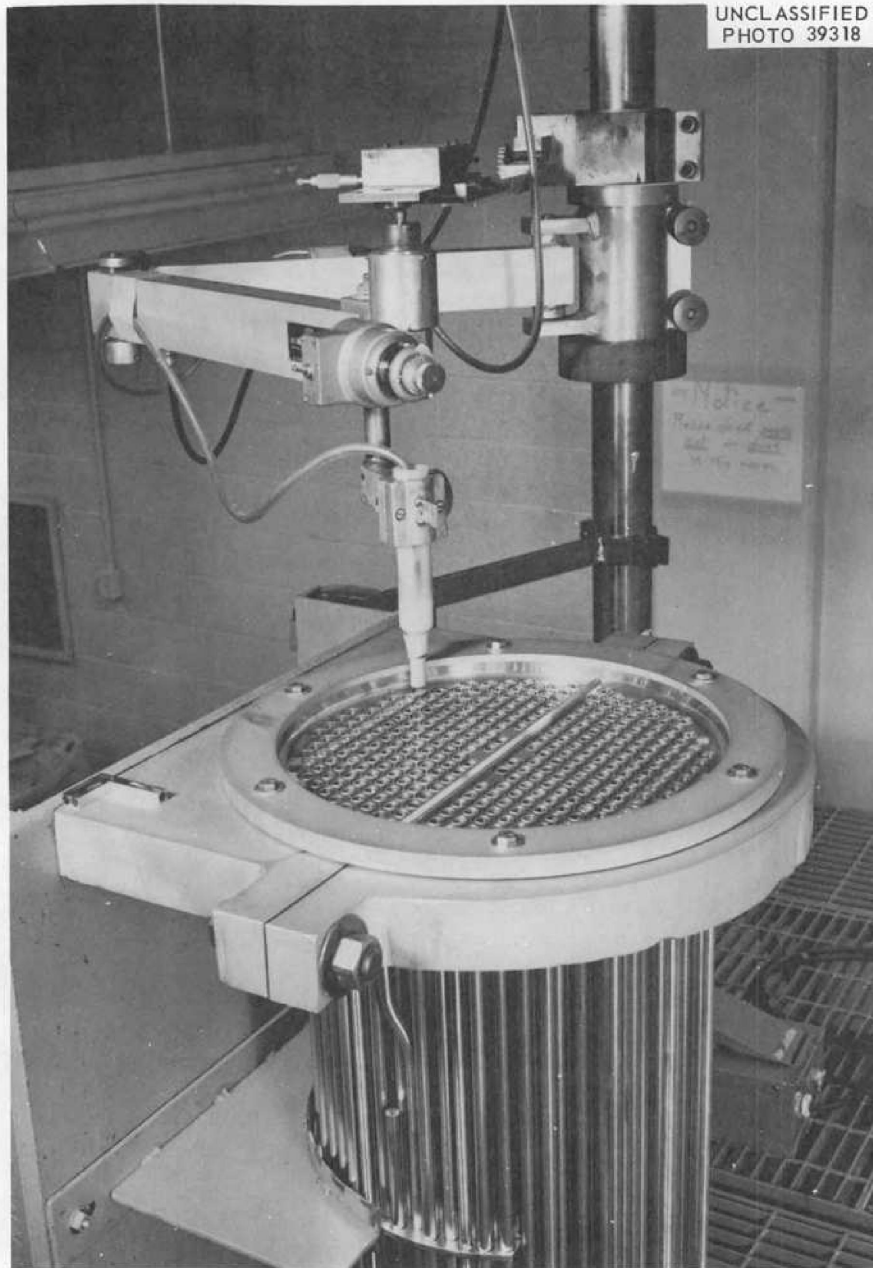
Specially Built Torch Positioned for Welding.
